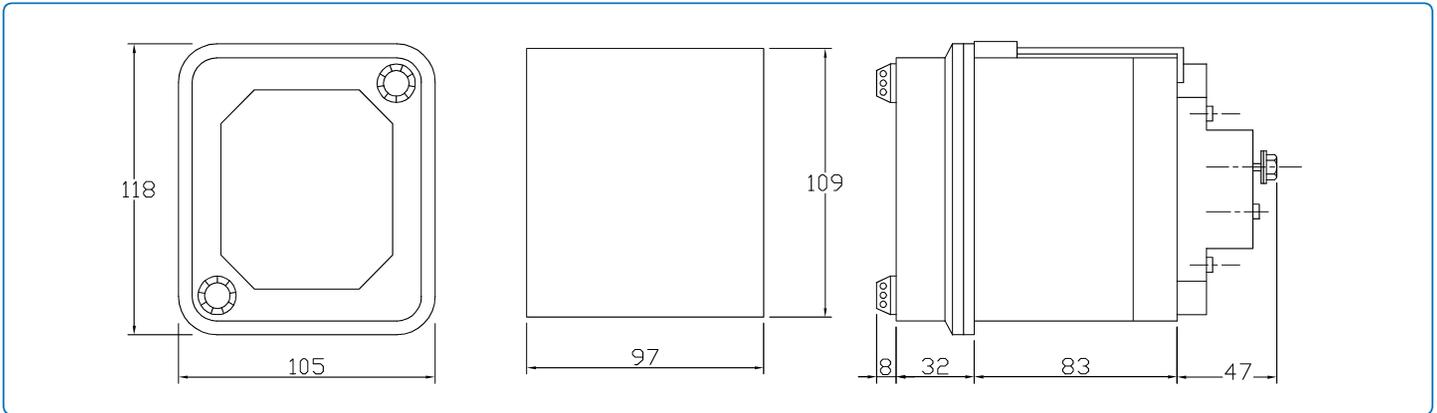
Case and Panel cut-out dimensions for case 1/4N (all dimensions in mm)
